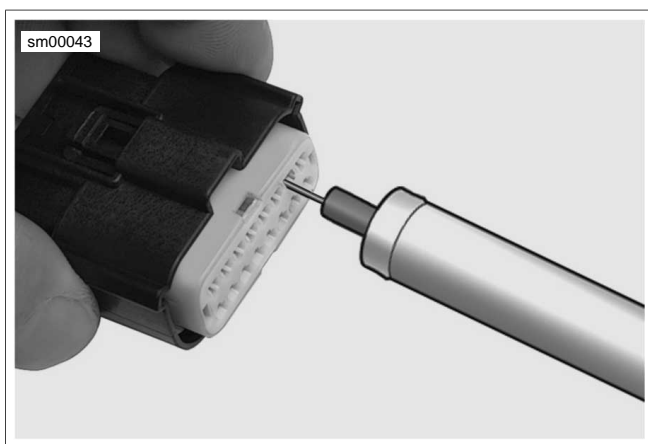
Molex Connector: Terminal Remover (HD-48114)
